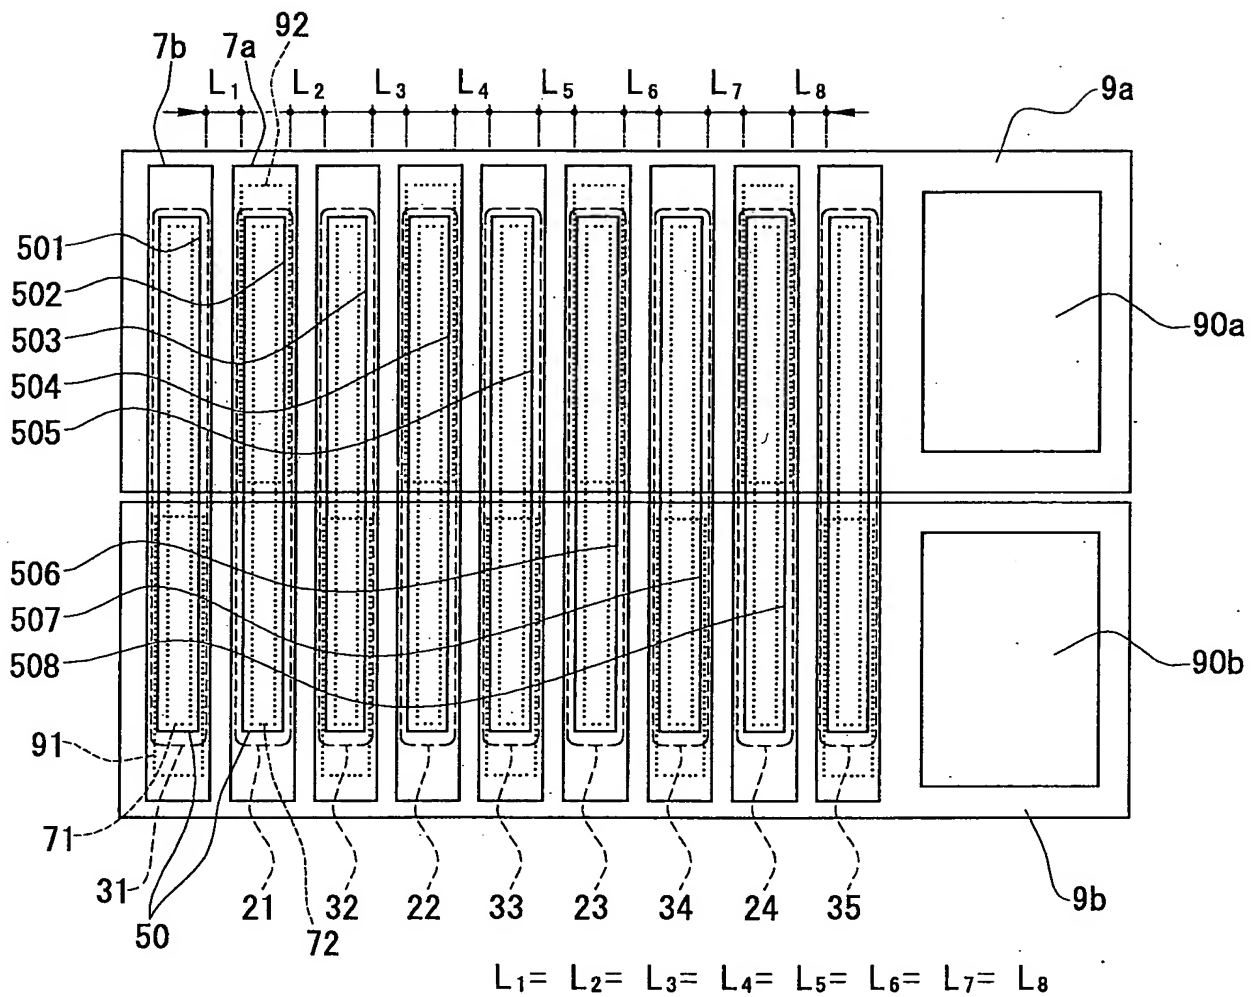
is a schematic diagram of a multi-layer printed circuit board (PCB) layout. The diagram shows a rectangular board divided into two horizontal sections, 90a (top) and 90b (bottom), separated by a central horizontal line 9a. The board is populated with eight vertical strips of components, labeled 7a and 7b. Each strip contains a series of rectangular components, with labels 501 through 508 indicating specific components. The strips are connected to a common ground plane 91. Dimensions are indicated: L_1 through L_8 for the width of each strip, and L_p and L_n for the height of the top and bottom sections respectively. The diagram also shows various other components and connections, including 31, 21, 32, 22, 33, 23, 34, 24, 35, 51, 52, 53, 54, 55, 56, 57, 58, 59, 71, and 92.
